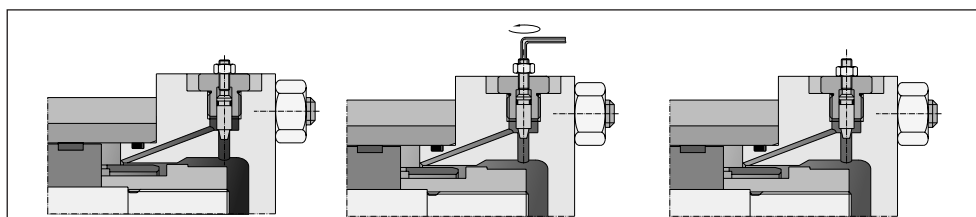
Adjustable end position cushioning with countered throttle bolt
